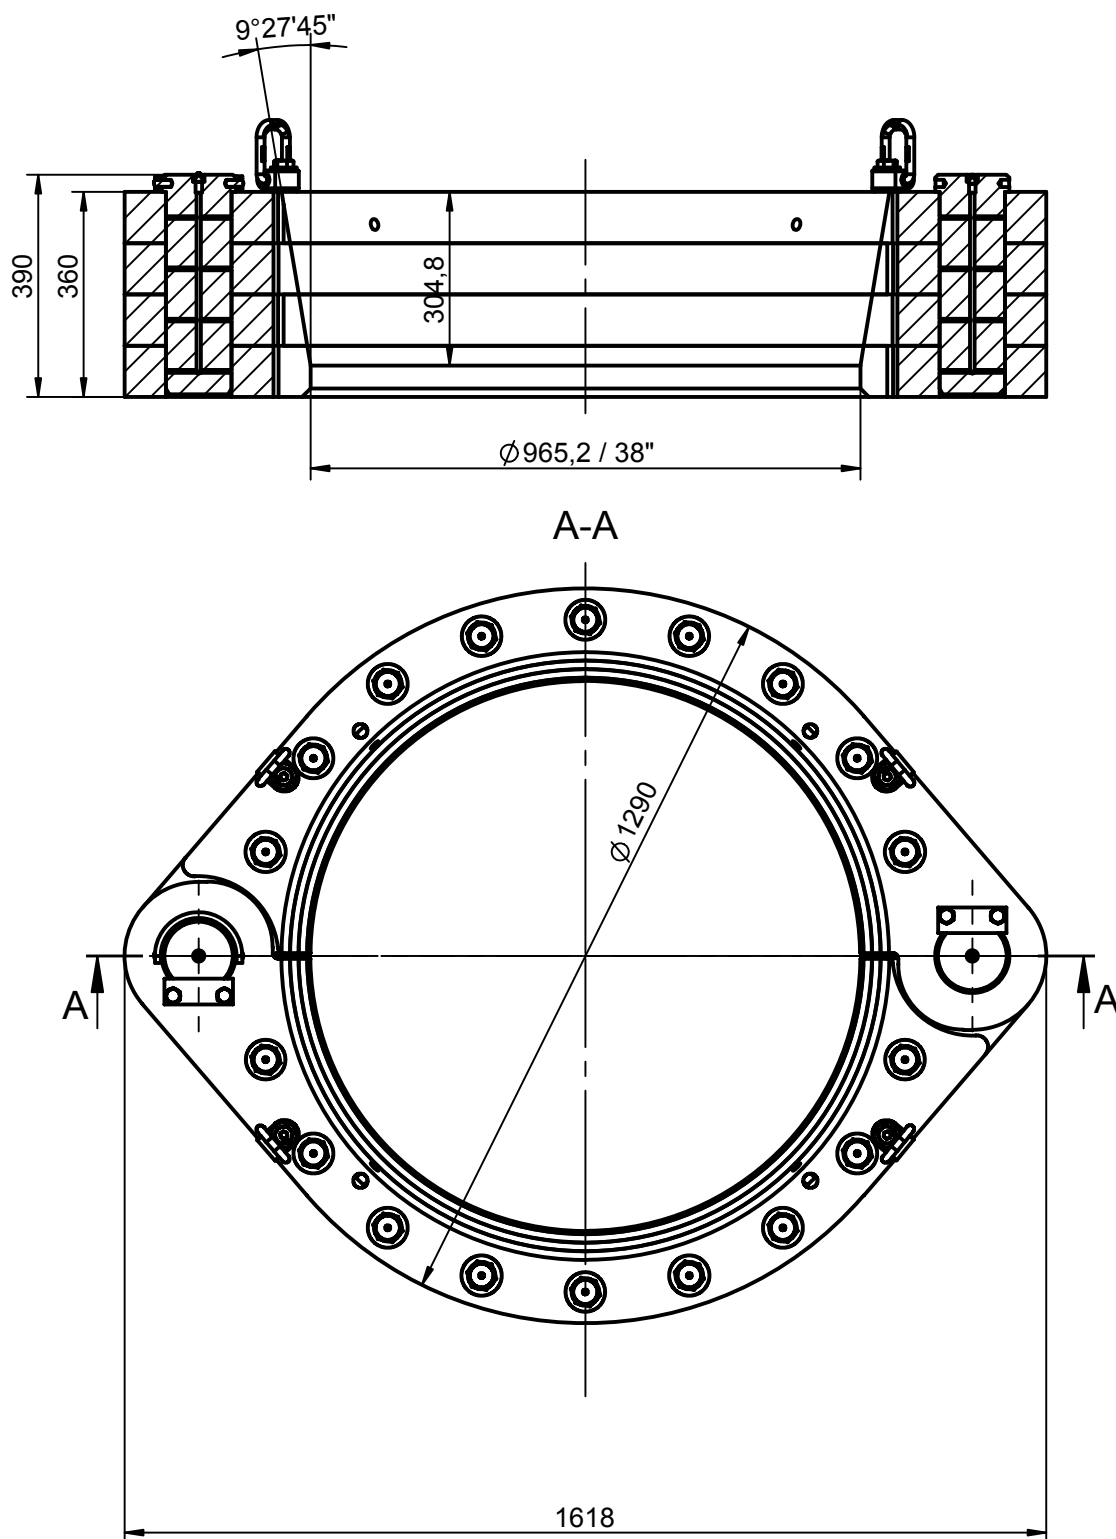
Principle drawing of a HCS 3500-36" main dimensions
